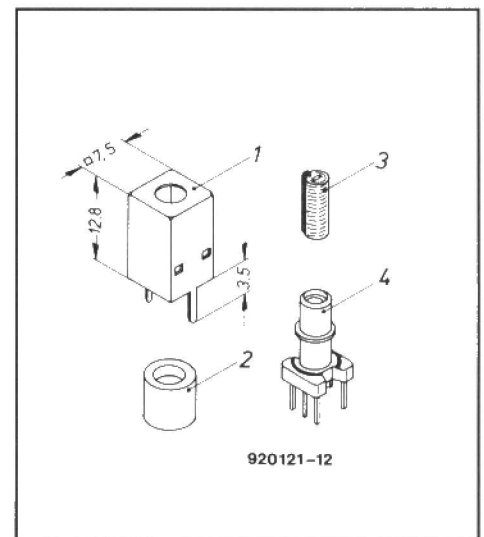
Neosid 7T1S inductor assembly. (1) screening can, (2) ferrite cup, (3) core, (4) former and base.
